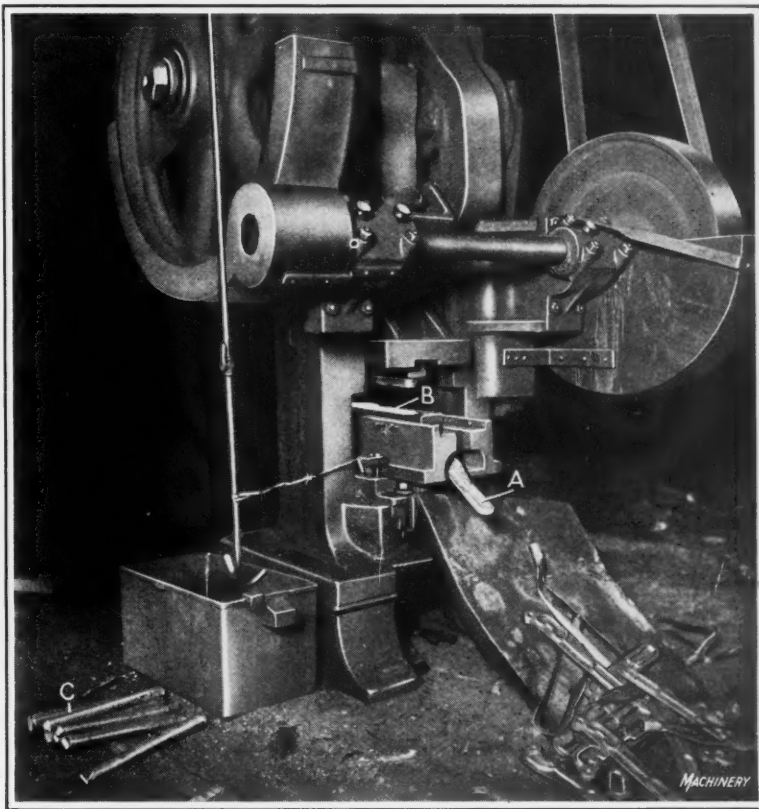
Geared Press engaged in a Hot-trimming Operation
